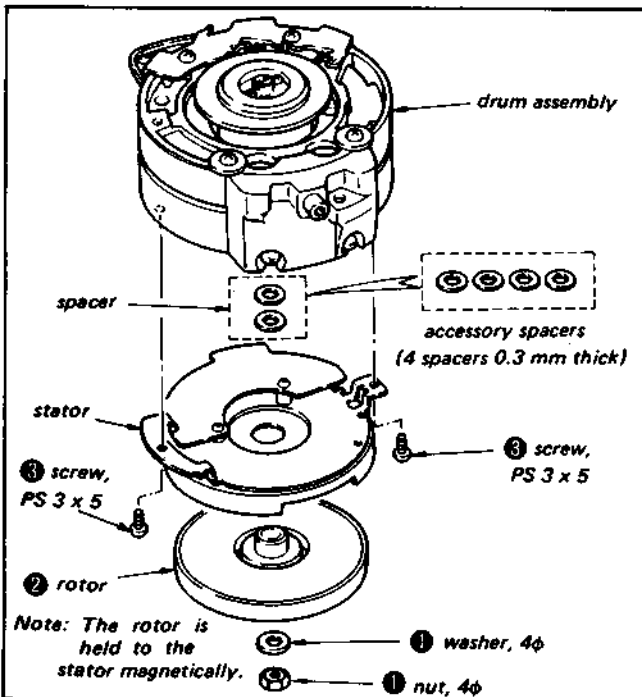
Removal of the stator and rotor when replacing the drum
